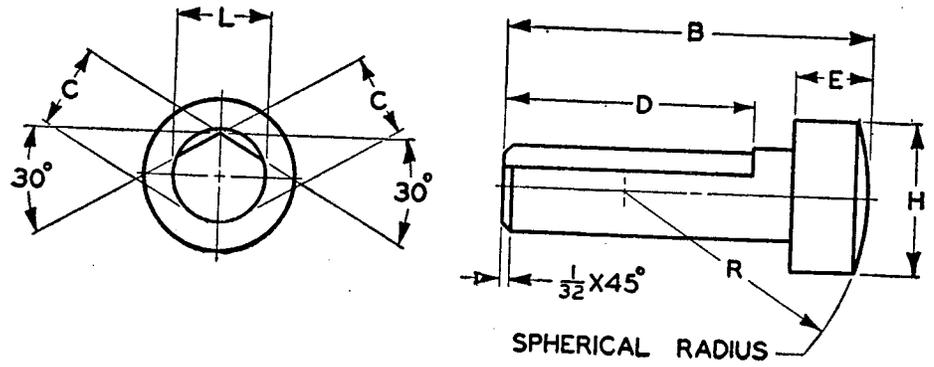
Model P adjustable plug gage bushing, nut, and key pin.
